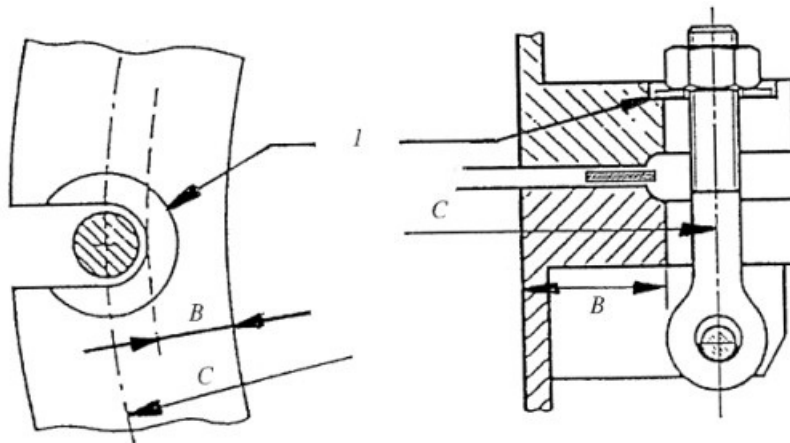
Flanges assembled by screw clamps with typical examples of security against slipping off
